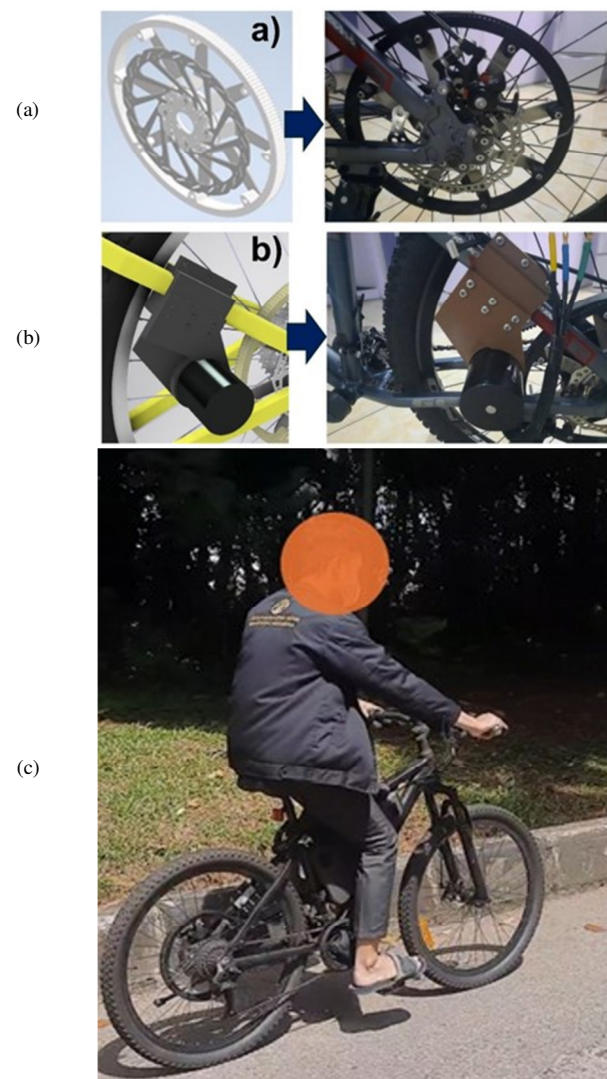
(a) Manufactured and assembled pulley assembly, (b) manufactured and assembled motor mount assembly, and (c) photo of the developed prototype e-bike on a driving test in Universitas Indonesia.
